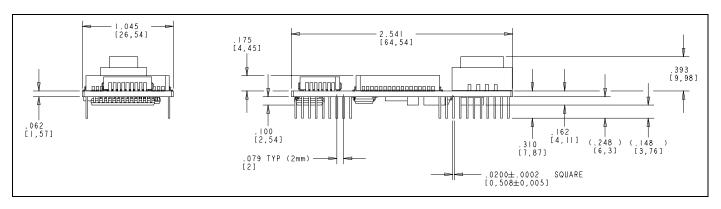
SocketModem Physical Dimensions - SFV336ACFW/SP
